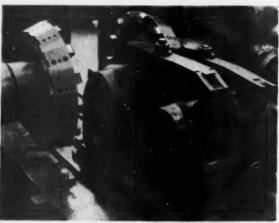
Milling the end faces of the casing on a Sundstrand Duplex machine
